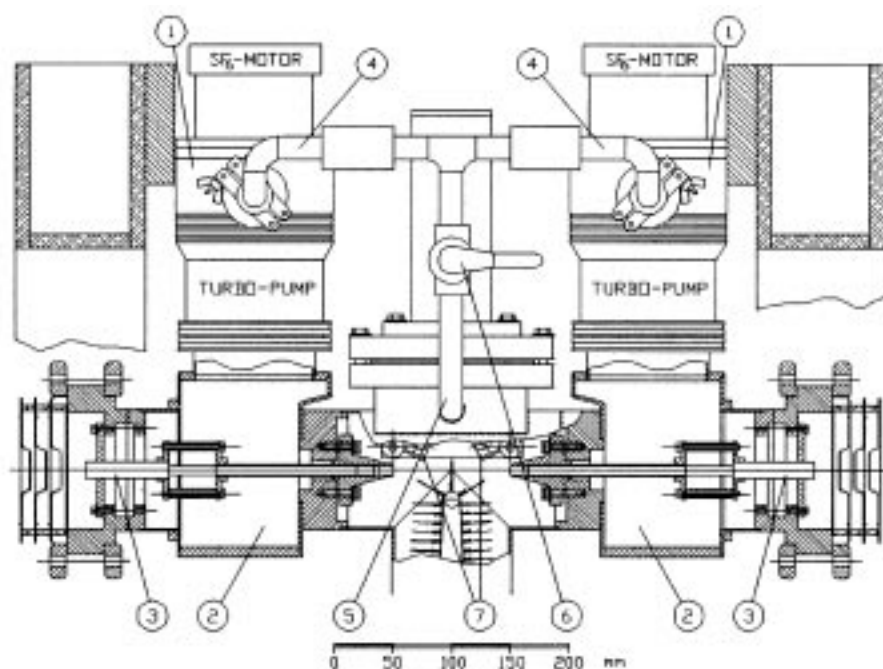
Schematic drawing of the stripper system. 1 – turbomolecular pumps, 2 – high conductance housing, 3 – limiting conductance pipes, 4 – pump outlet pipes, 5 – stripper housing gas inlet, 6 – valve, 7 – double valve.
